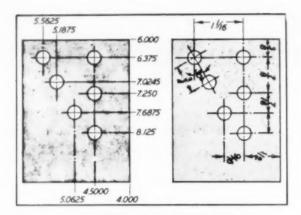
The workpiece shown at the left is dimensioned according to coordinate principles while the workpiece at the right has been dimensioned by the conventional method.
